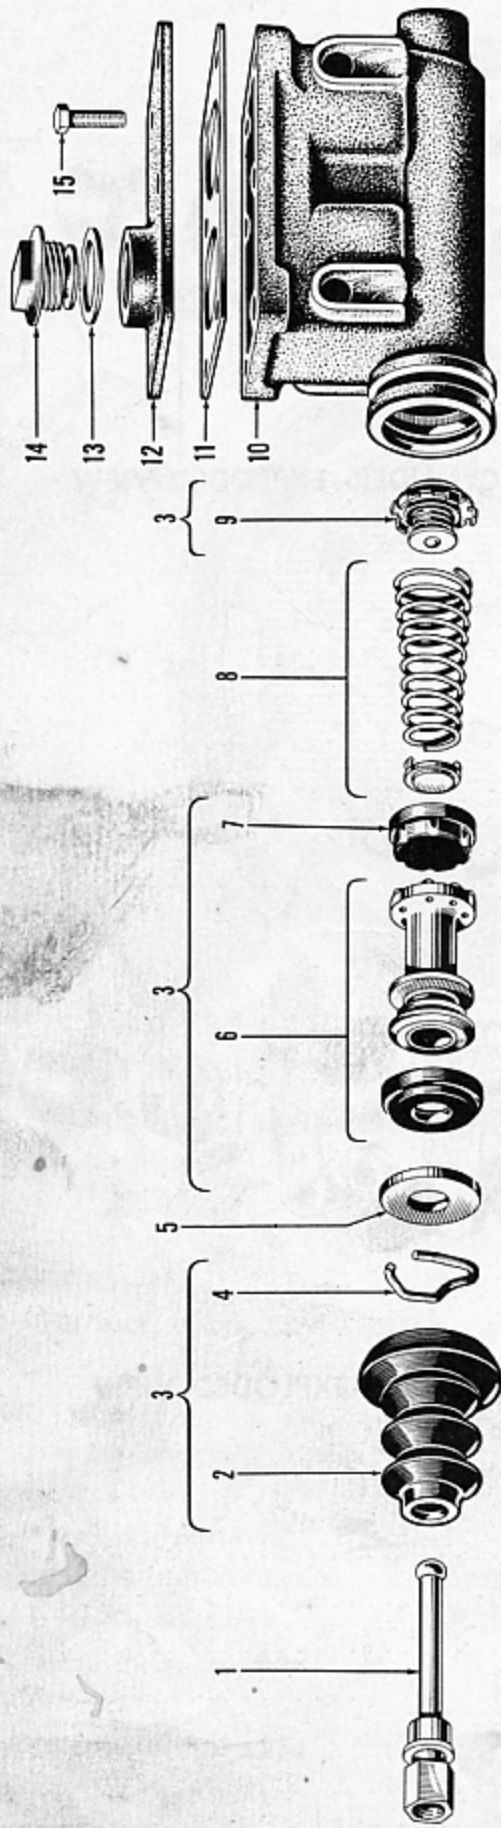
MASTER BRAKE CYLINDER—EXPLODED VIEW
